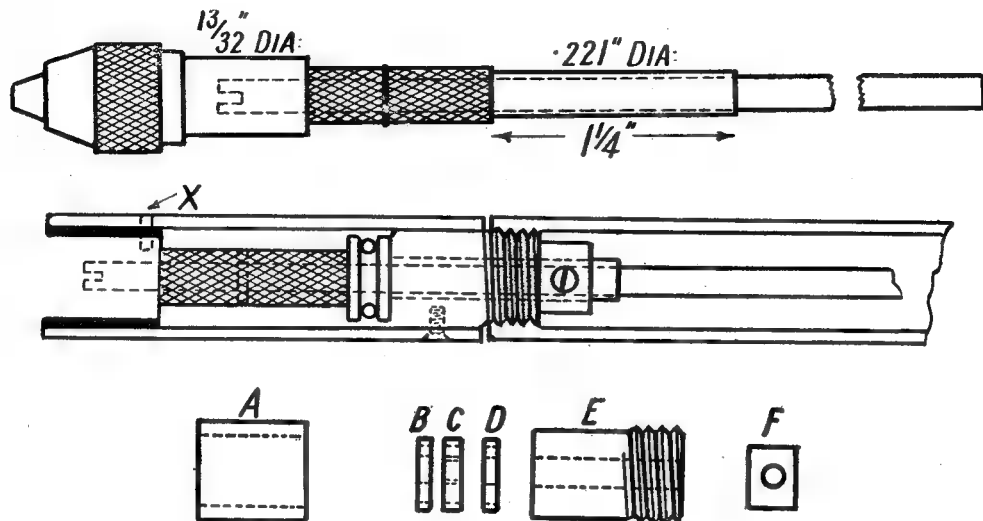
Spindle machined with silver-steel rod insert, recessed at front, pinned in position. General arrangement of nose-piece, showing bushes, thrust-race assembly securing collar and tommy bar hole, ("X"). ("A")—Front bush; ("B")—Front thrust washer; ("C")—Ball cage; ("D")—Rear thrust washer; ("E")—Rear bush threaded  $\frac{1}{8}$ -in. B.S.P.; ("F")—Terminal securing collar with set-screws,  $\frac{1}{8}$ -in. Whit. (Approximate scale)
